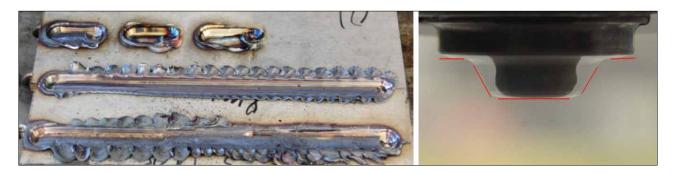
Experimental setup for wear resistance determination (l.), Si_sN_s -tool before and after 12 immersions, and 9,5 m welding length (r.)
